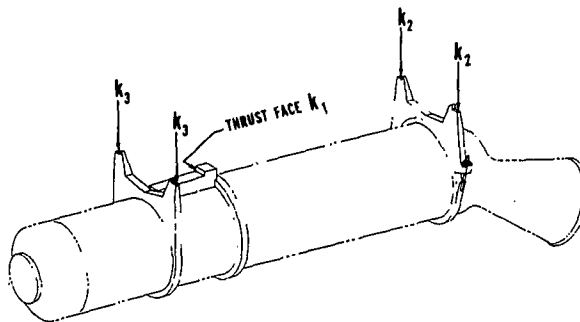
Sketch of motor showing mounting structure and location of gauges
